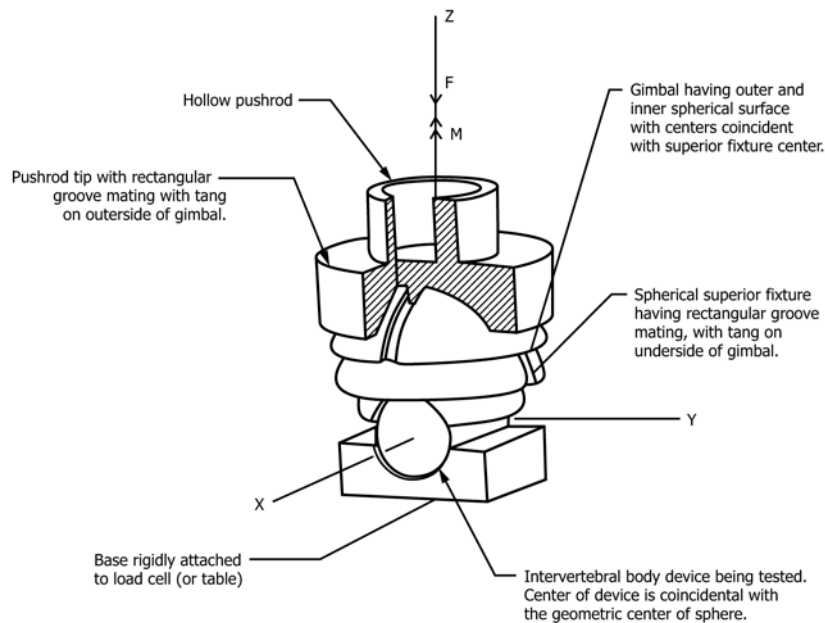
Spherical Gimbal (Cross Section) for Torsion Testing Apparatus
